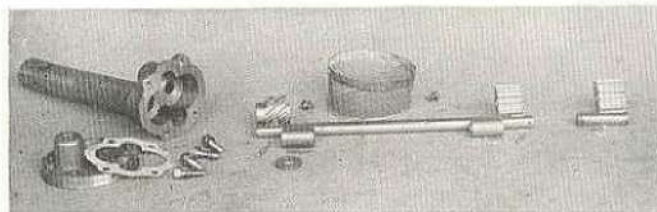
Oil Pump with completely disassembled and component parts placed in proper order of assembly.
